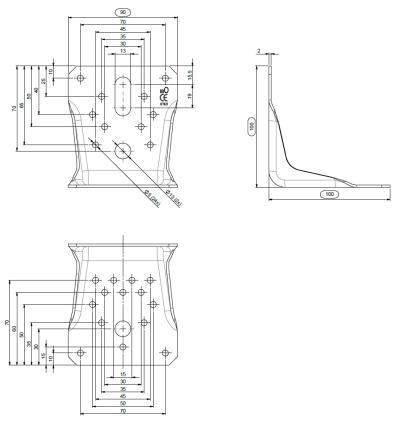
Dimensions of Angle Bracket KR 100, thickness 2,0 mm
